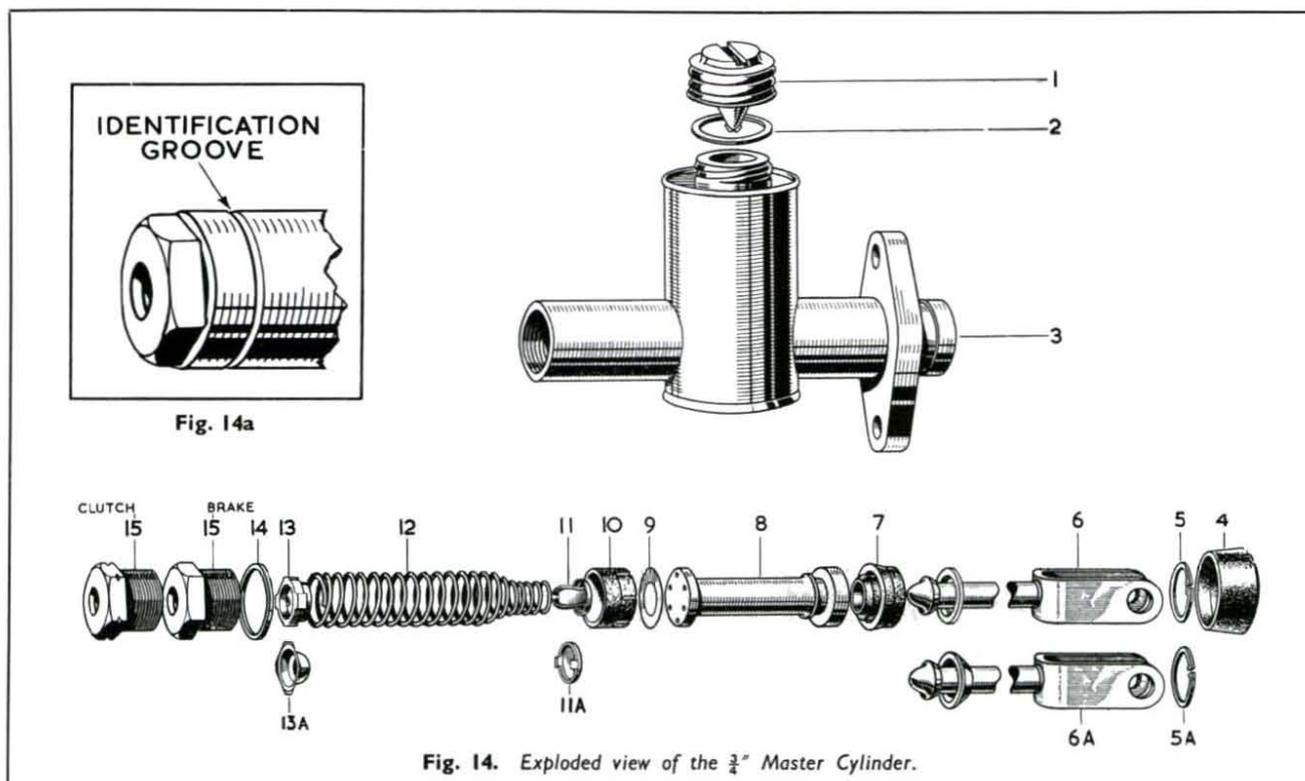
Exploded view of the $\frac{3}{4}$ " Master Cylinder.
